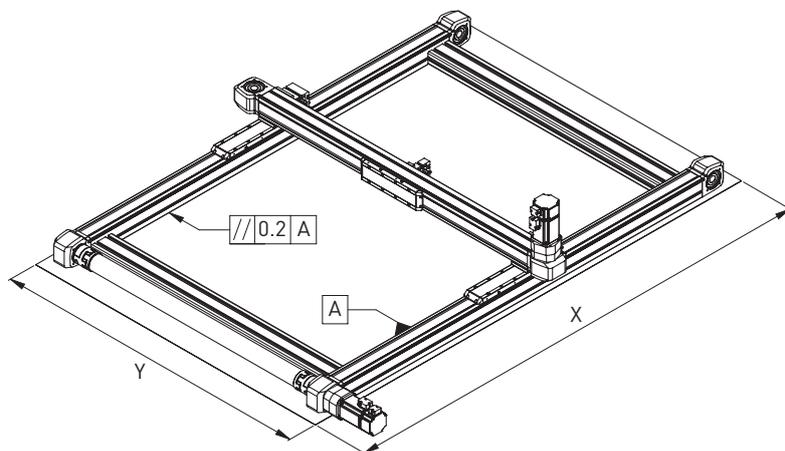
Flatness and parallelism requirements for mounting double axes HD and multi-axis systems HS
